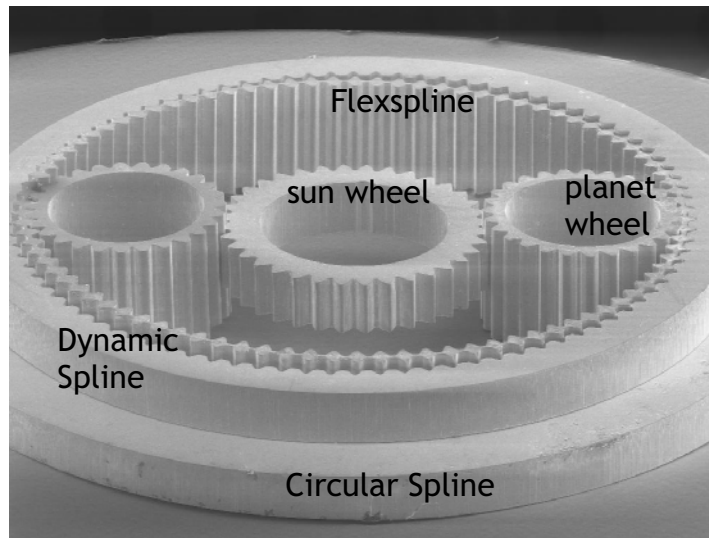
Components of the Micro Harmonic Drive® Gear
